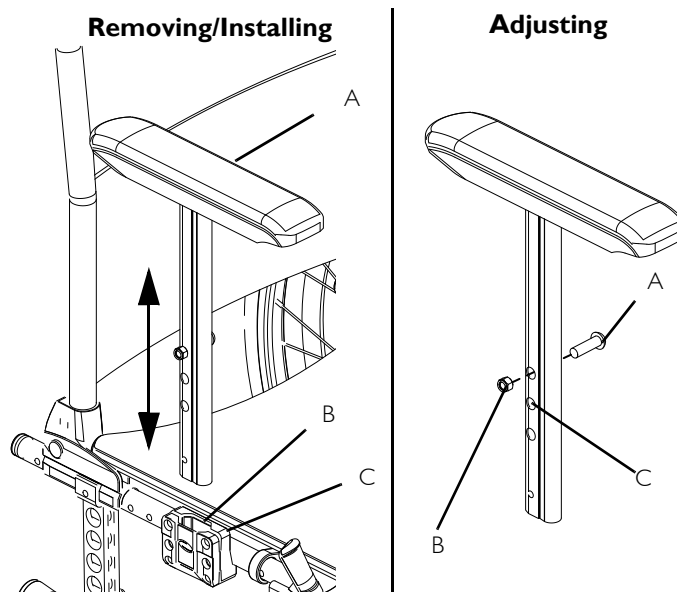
FIGURE I Removing/Installing and Adjusting Non-Locking T-Arms
